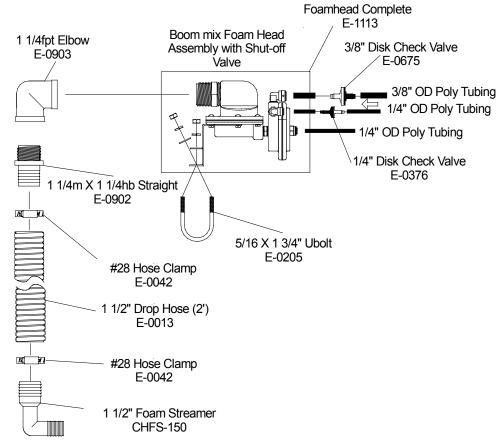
BOOM TRACKER Foamhead and Boom End Assembly
